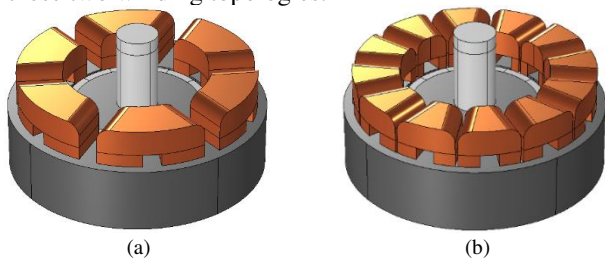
Views of end-windings for (a) single- and (b) double-layer windings.
